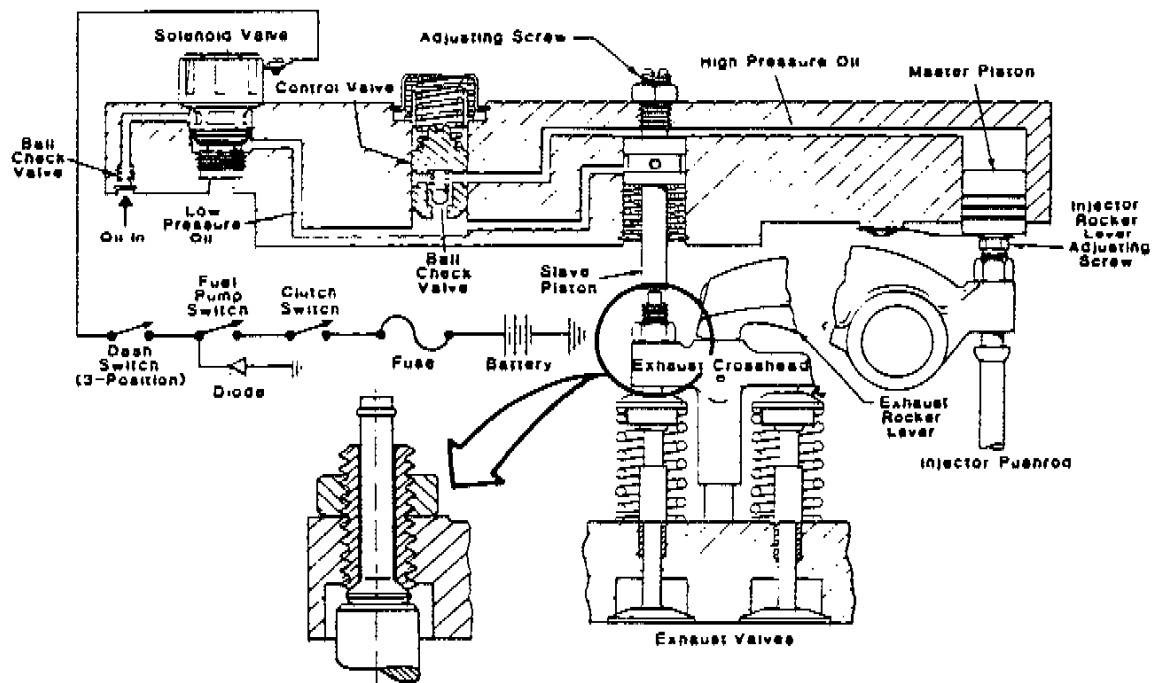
Schematic Diagram of Model 404 Jacobs Engine (New Version) [4.3].
